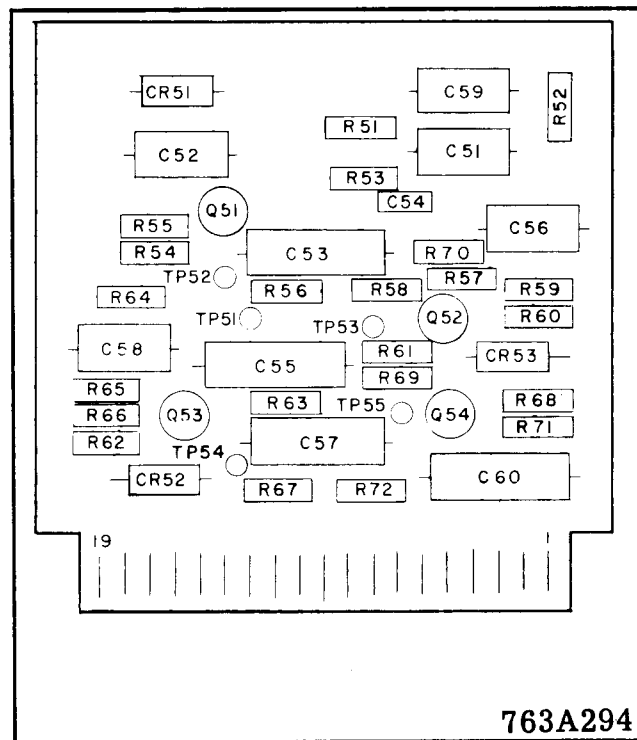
Component locations on the amplifier and limiter printed circuit board.
